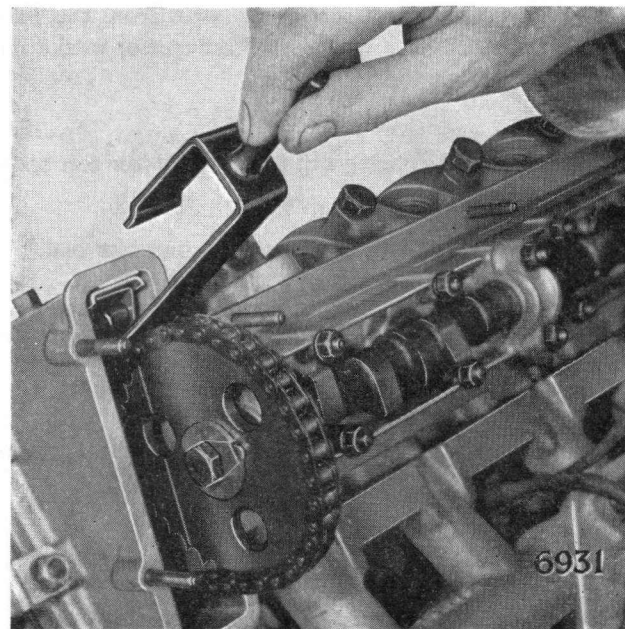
Inserting camshaft chain tensioner compressing tool R.G.354
